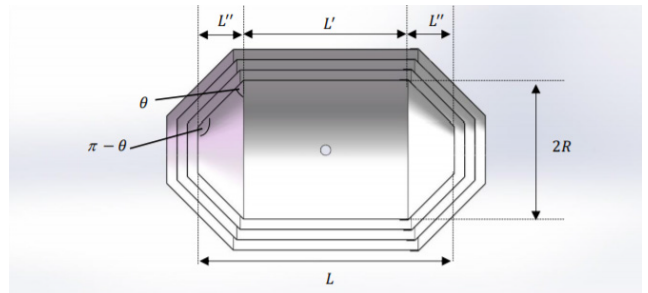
Sectional view of four-layer spindle-shaped magnetic shield barrel.
